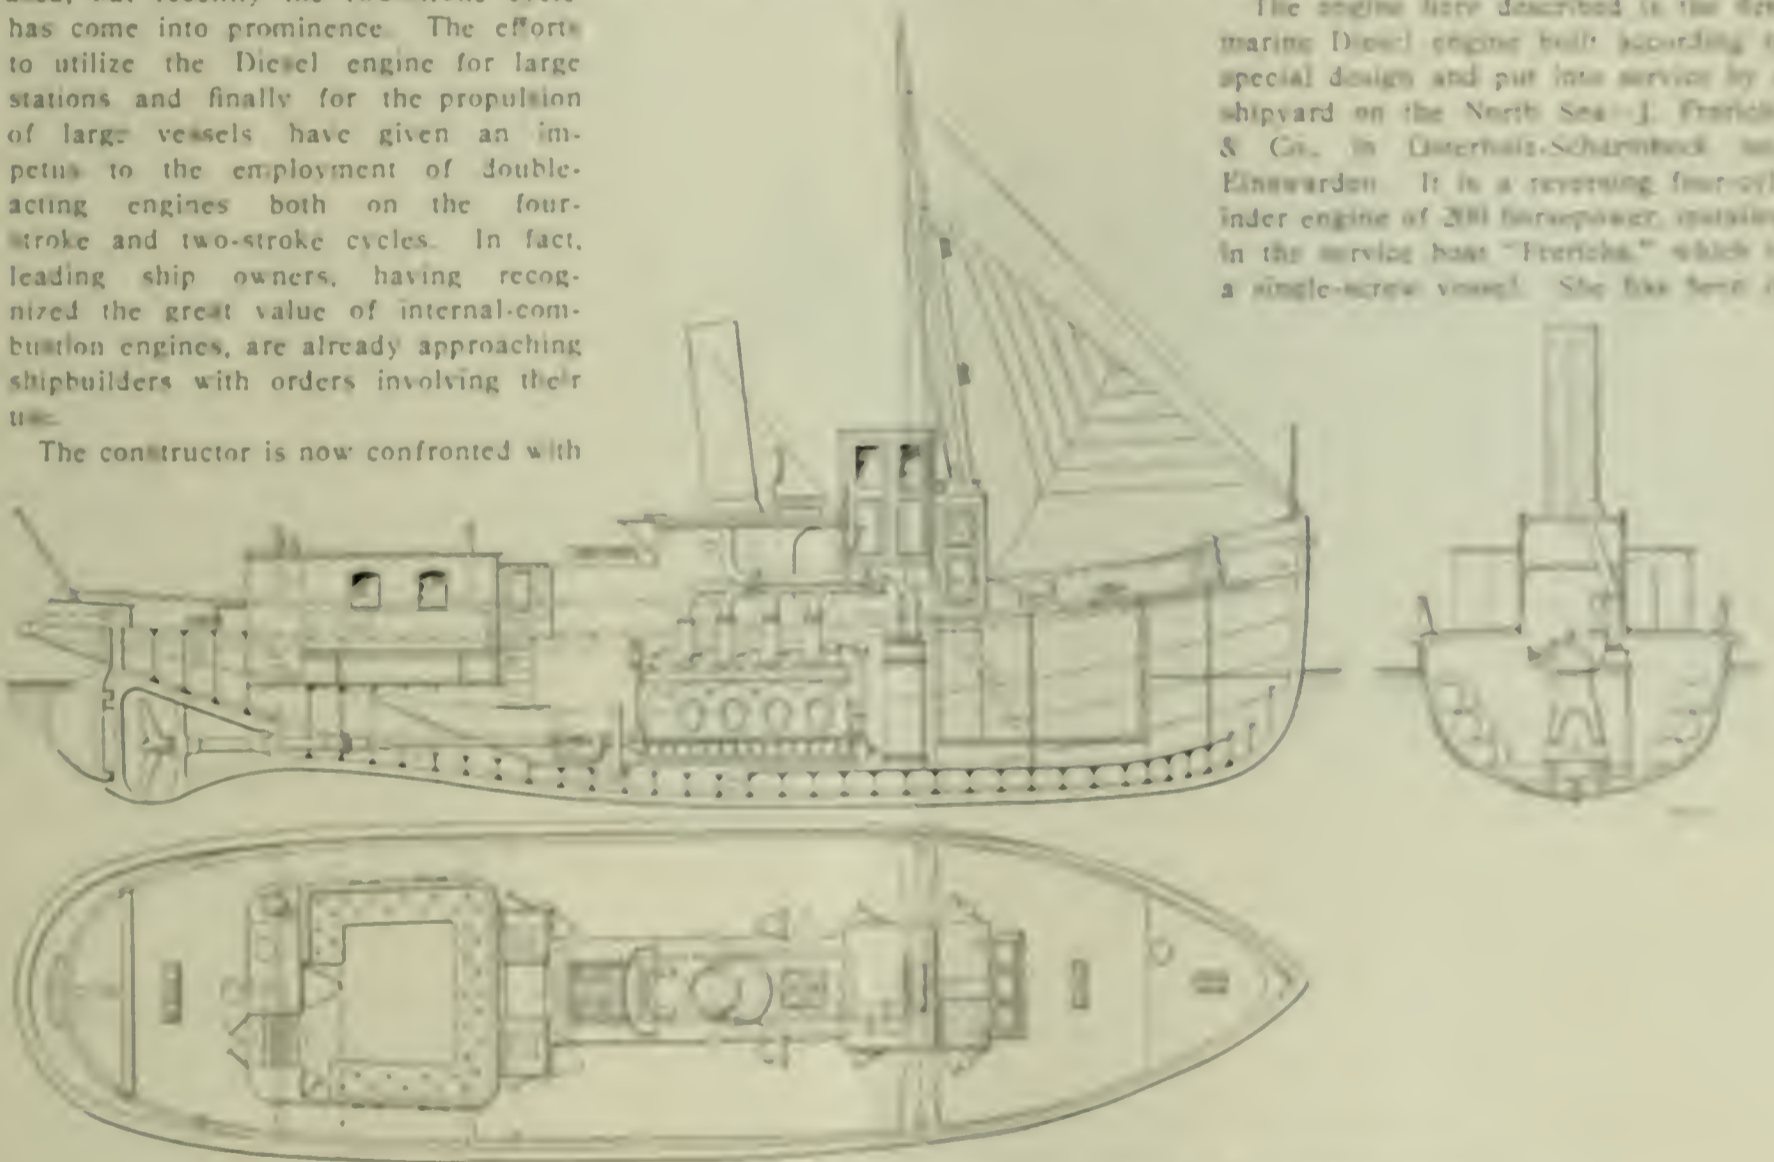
SHOWING ARRANGEMENT OF DIESEL ENGINE EQUIPMENT IN THE "FRERICHS"
